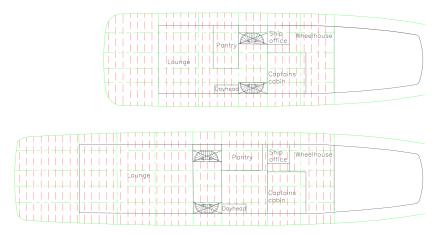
The construction overview of the sun deck for the minimum and maximum length, in green the primary stiffeners and in red the secondary.
